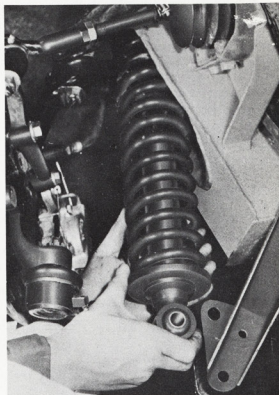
Removing Coil Spring & Shock Absorber V1336
